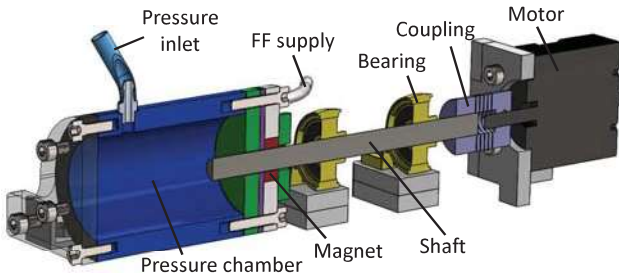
Cross-section of the test setup. The seal module is mounted on a pressure chamber which creates the sealing environment. A DC motor drives the ferromagnetic shaft supported by two ball bearings.
